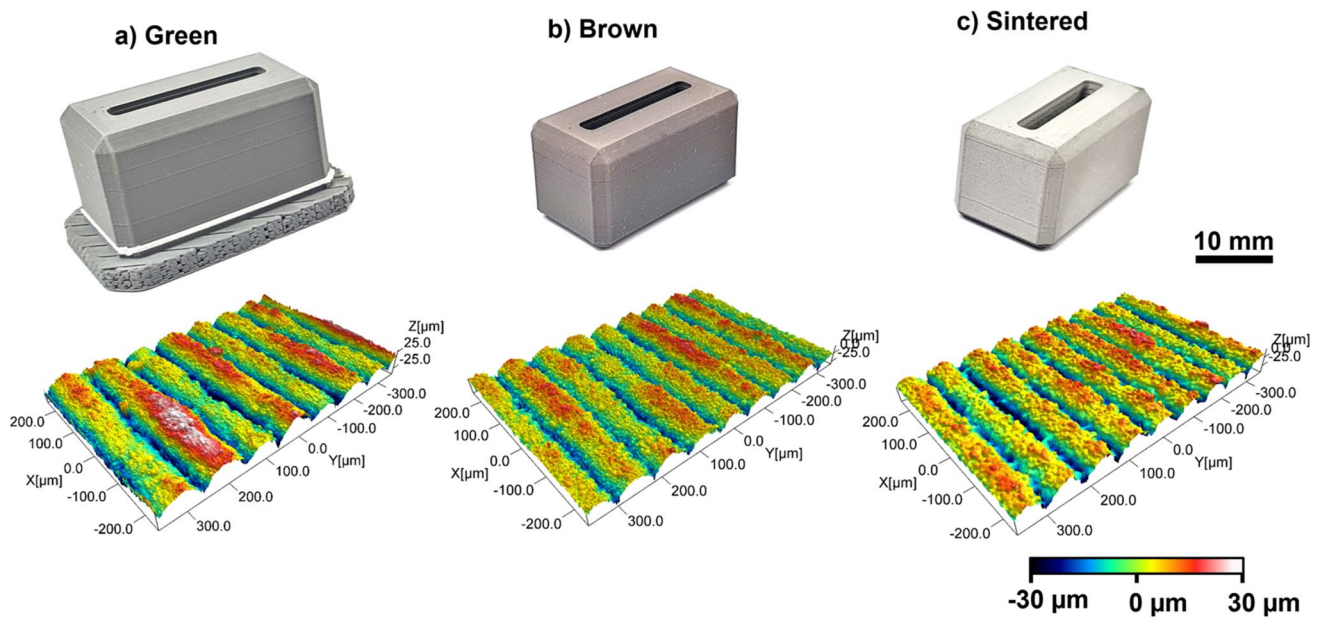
Internal die cavity surface roughness of MAM tool insert a as printed, b debinded and c sintered. Inserts are shown true to size. Surfaces were measured after cutting the inserts
